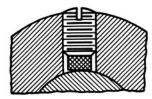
A further improvement is a brass plug making a loose fit with the inside diameter of the threaded hole.
